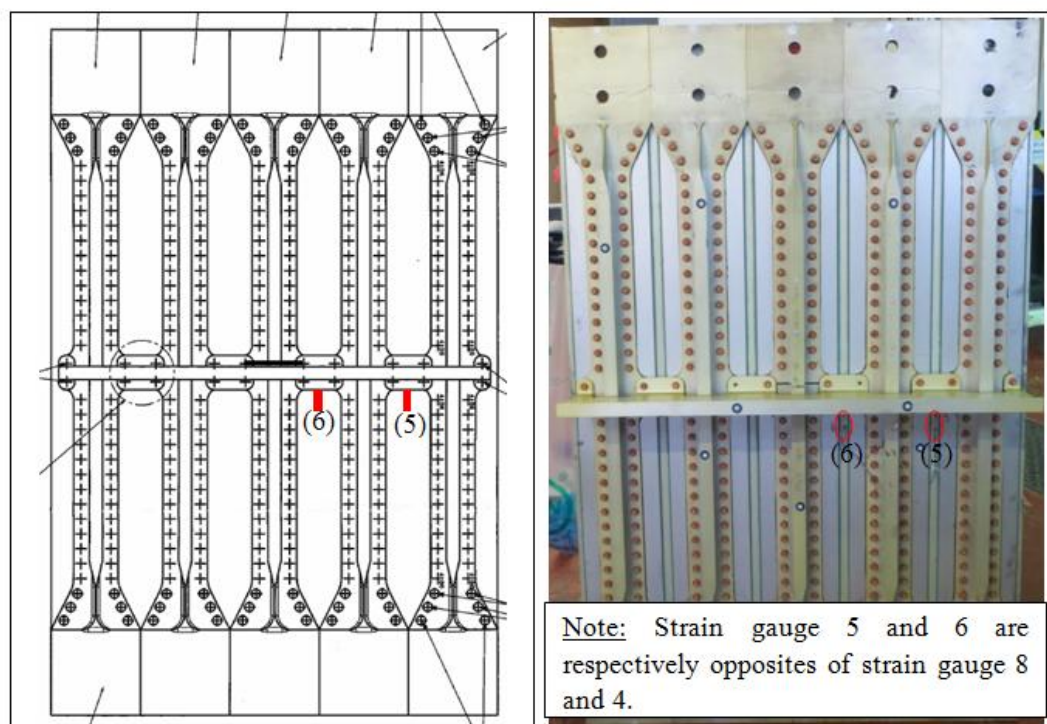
Panel strain gauge location – Back view (strain gauge 5, 6)
